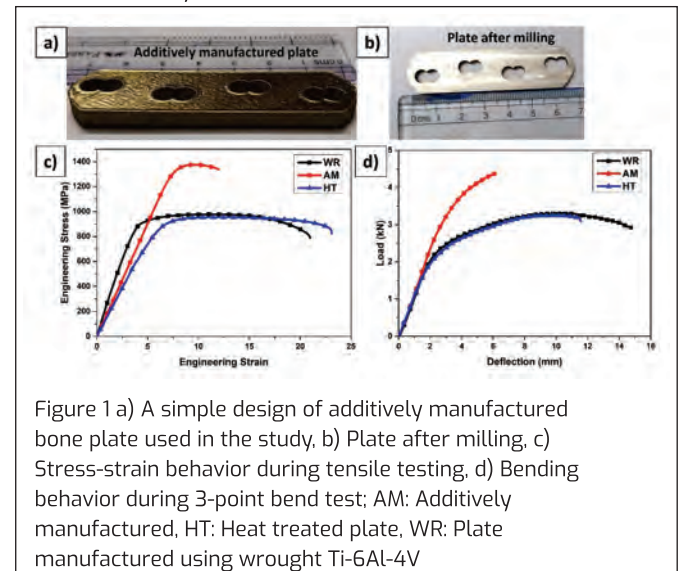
a) A simple design of additively manufactured bone plate used in the study, b) Plate after milling, c) Stress-strain behavior during tensile testing, d) Bending behavior during 3-point bend test; AM: Additively manufactured, HT: Heat treated plate, WR: Plate manufactured using wrought Ti-6Al-4V
